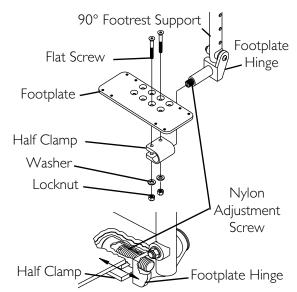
Installing Adjustable Angle Flip-up Footplates
